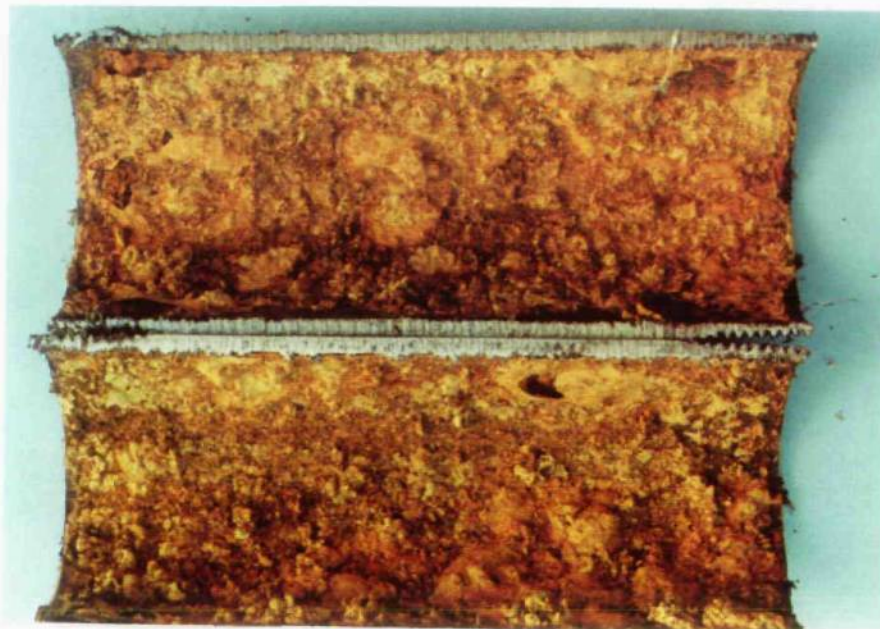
(a): Internal surface of carbon steel pipe specimen cleaning (X0,64).
